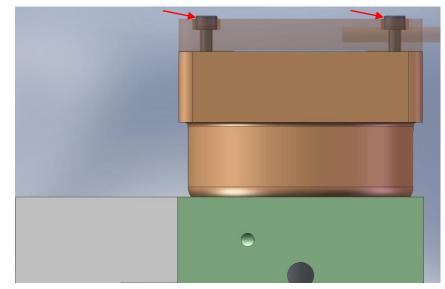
Close-up view of ADE sensor mounted to Sensor Head Base. Heads of sensor mounting screws stand approximately .020" proud of sensor face. This prevents contact between center of Sensor Target Face and active area on sensor probe.
